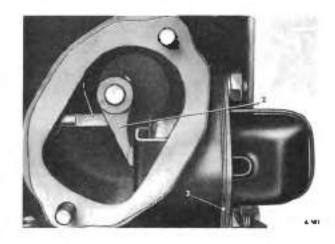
Solonold adjustmens — SL cars 4. Diamatage unik rod - 2. Butterity Lever - 3. Seeks
